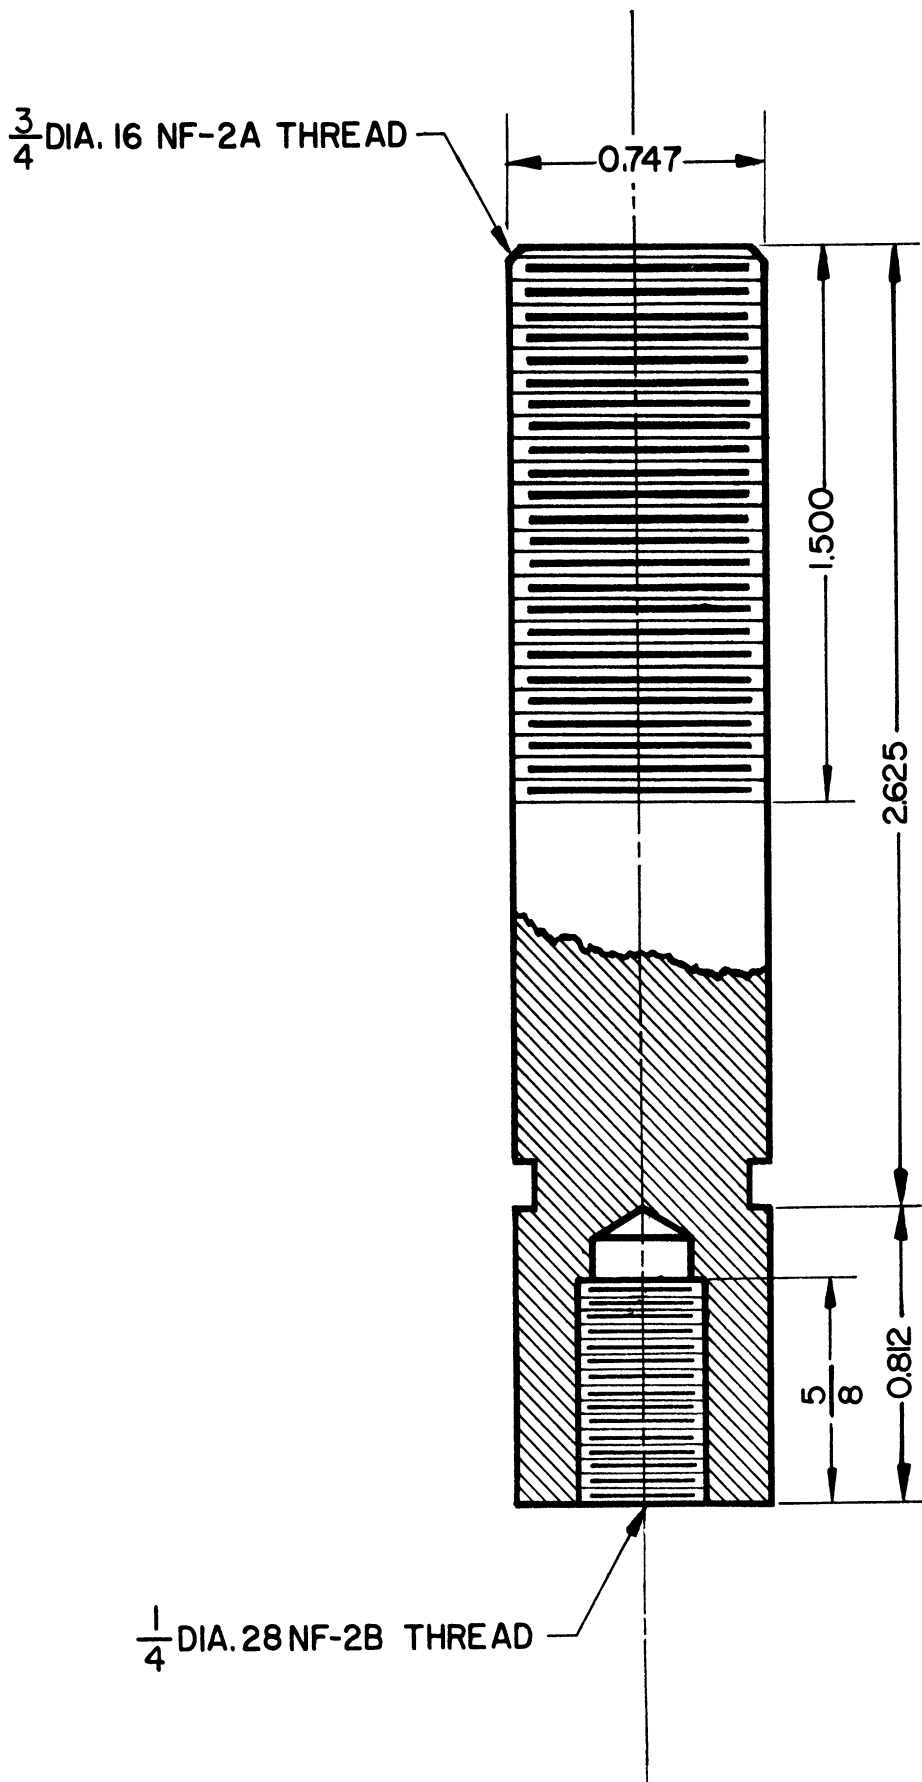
Dimensional Drawing of Pin Specimen Holder
